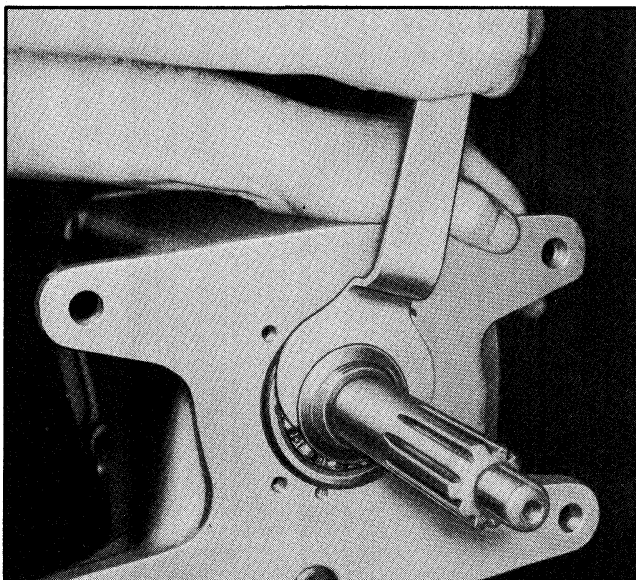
A-14 Removing or Replacing Main Drive Gear Retaining Nut
